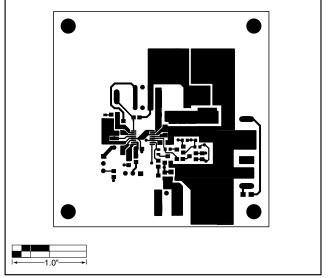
MAX1748 EV Kit PC Board Layout—Component Side
